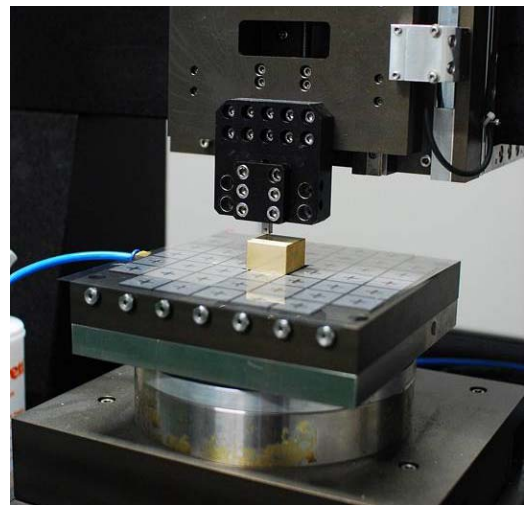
Appearance of processing test using fabricated multi-array diamond tips
